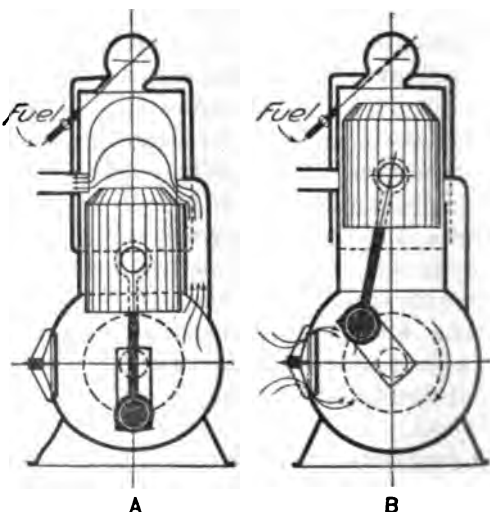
Explosion oil engine having a two-stroke cycle. A, view when piston is at outer (lower) dead center; B, view when piston is approaching inner (upper) dead center.
